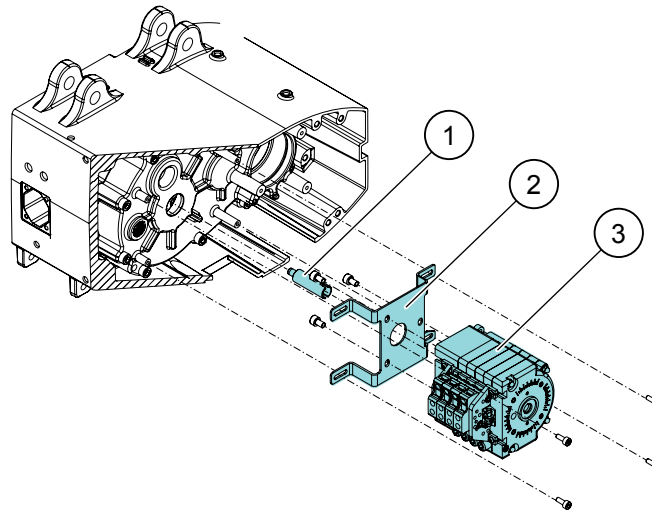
4-step rotating geared limit switch, SL05-SL10
